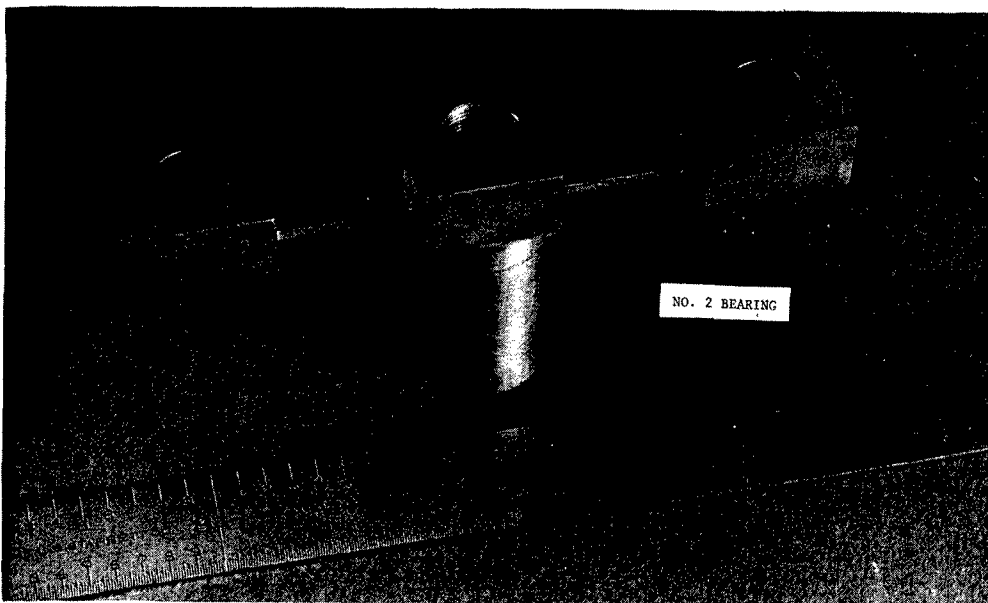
View Of An Upper Pivot-Support Flexure
